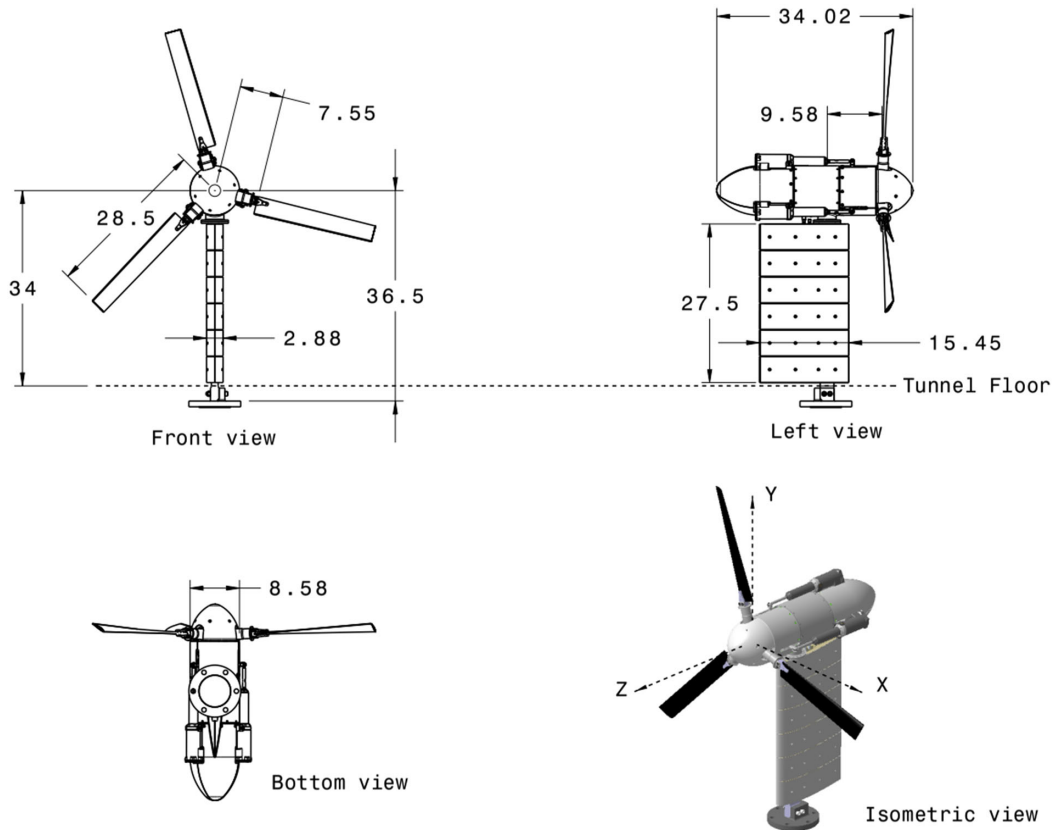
Three-view diagram of the Maryland tiltrotor rig; dimensions in inches.
